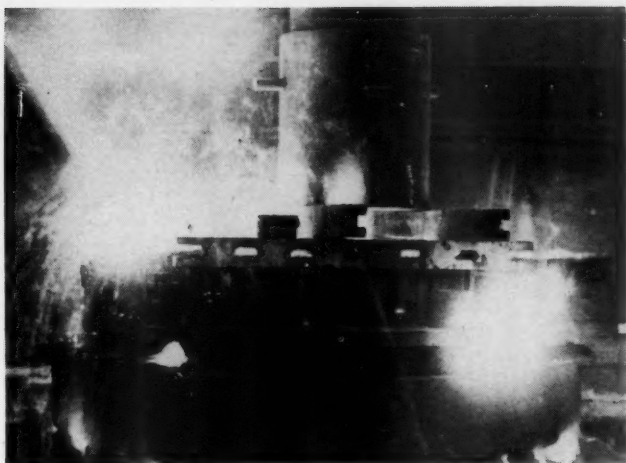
POURING THE GAS ENGINE CYLINDER.
